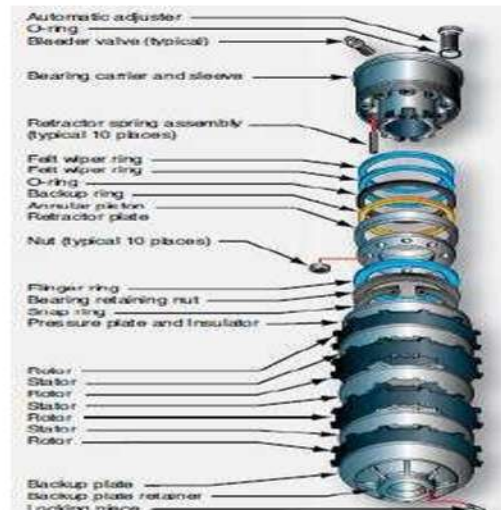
A multiple disc brake with bearing carrier upon which the parts of the brake are assembled including an annular cylinder and piston assembly that apply pressure evenly to a stack of rotors and stators.
